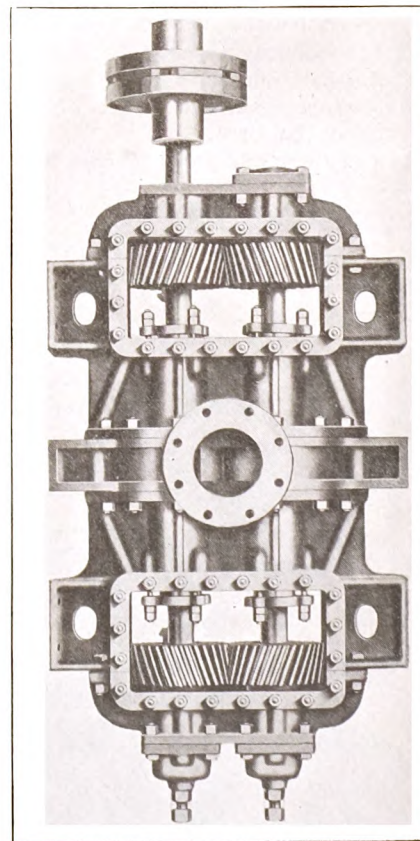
CARGO PUMP WITH GEARS EXPOSED
